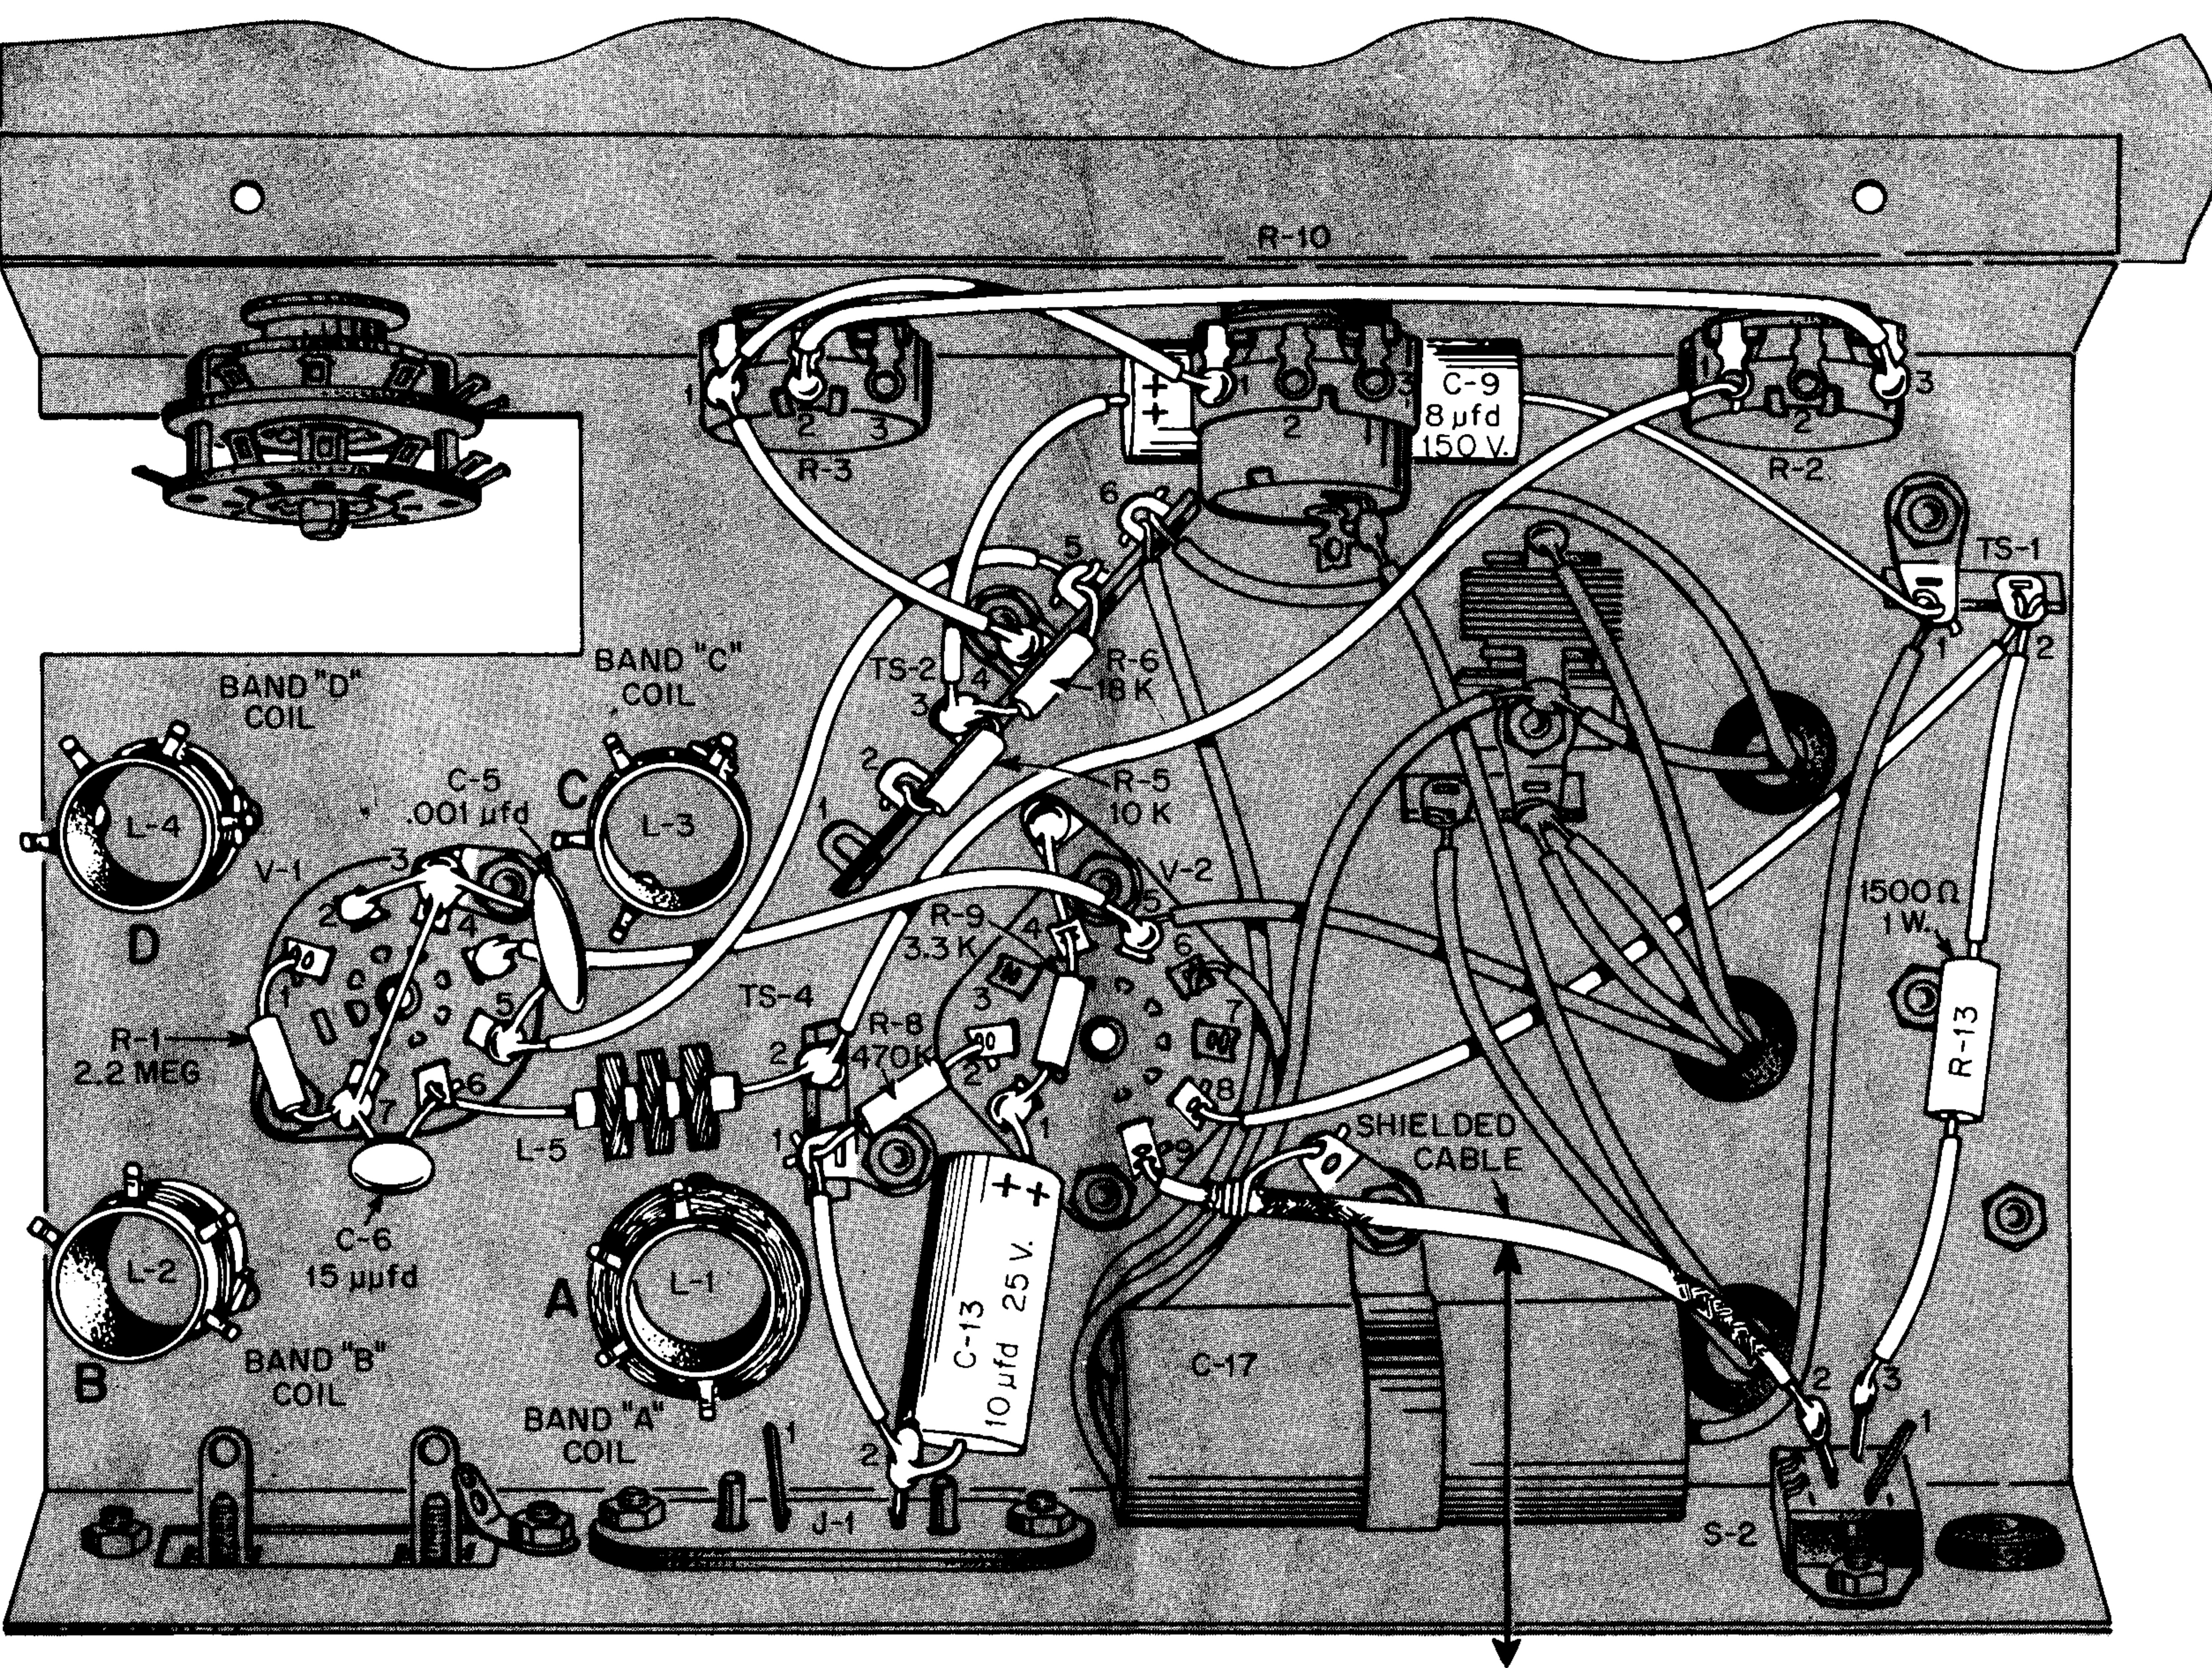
SECOND PARTS MOUNTING AND WIRING VIEW
